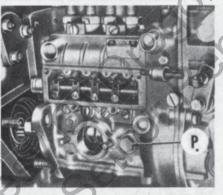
A - View of Bosch injection pump used on Models 834 and L54 showing location of drain plug (P).
